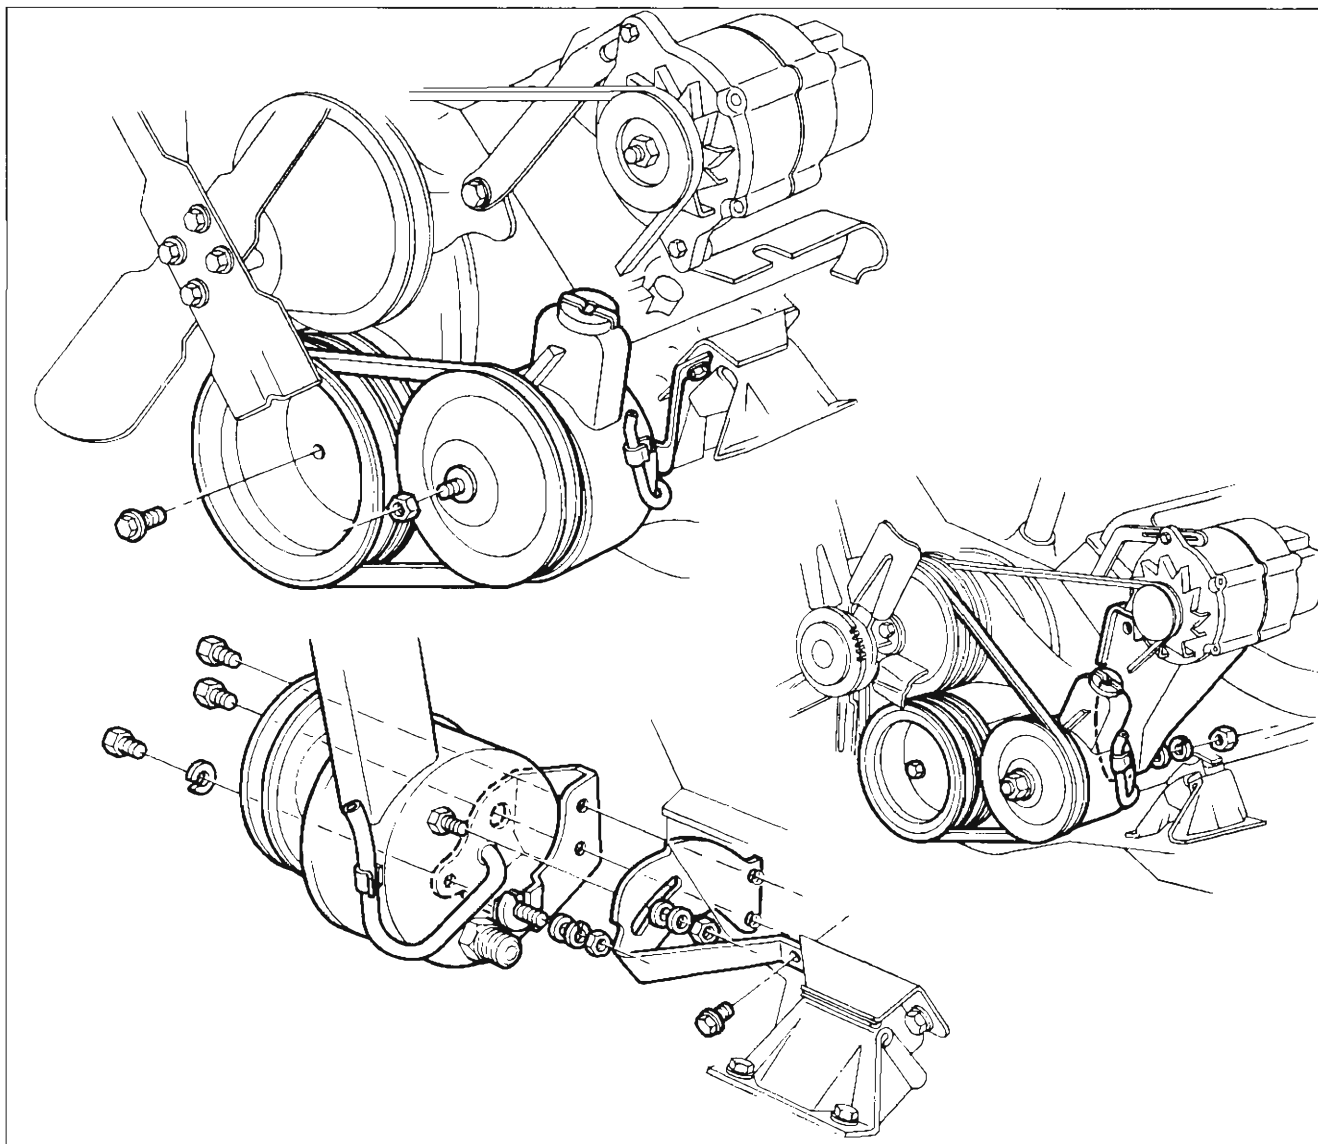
Power Steering Pump Installed—8 Cylinder Engine
